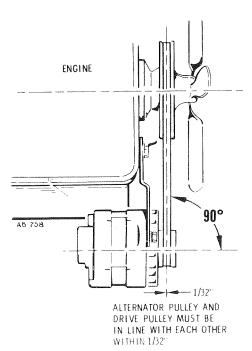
ALTERNATOR BELT ALIGNMENT
